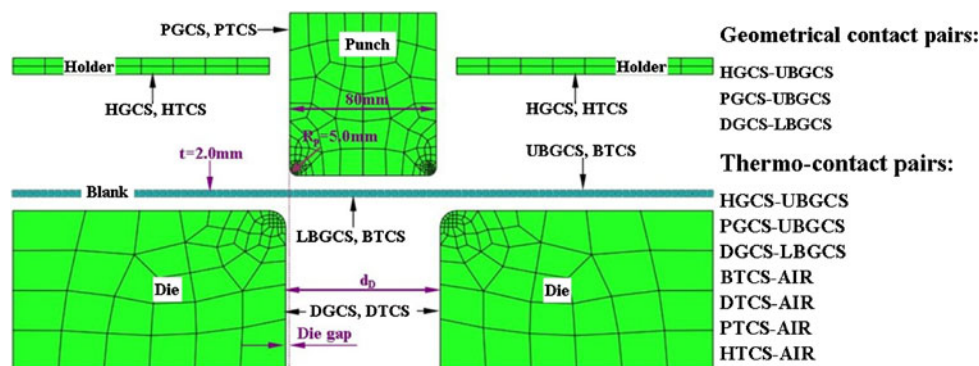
2D coupled thermo-mechanical FE model for U-channel part forming
